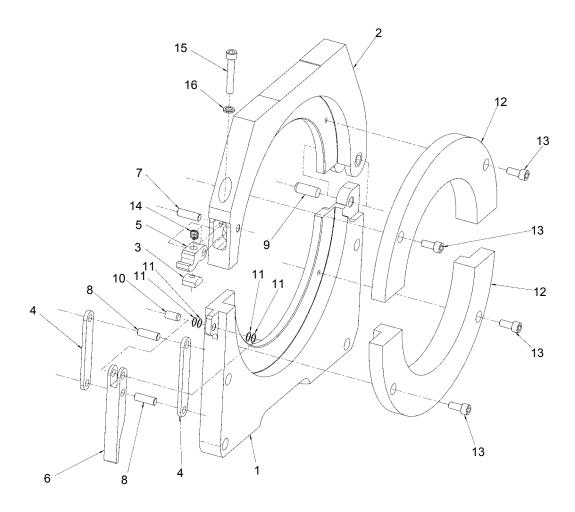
SWS-40H Fixture Side Plate Assembly – Right
